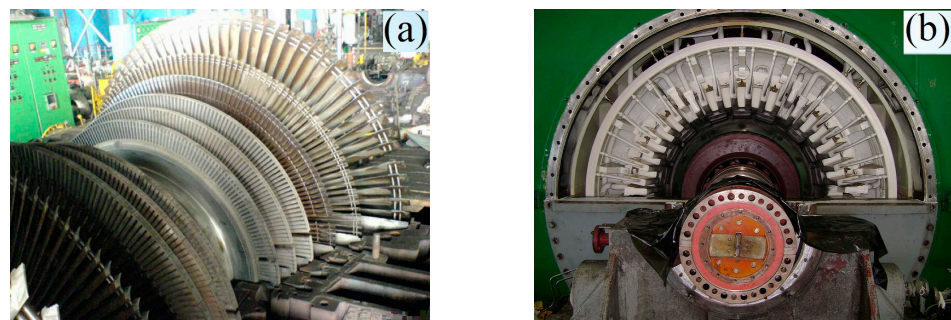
Rotor shaft of the turbine unit with damaged blades (a) and disassembled bearing (b).
